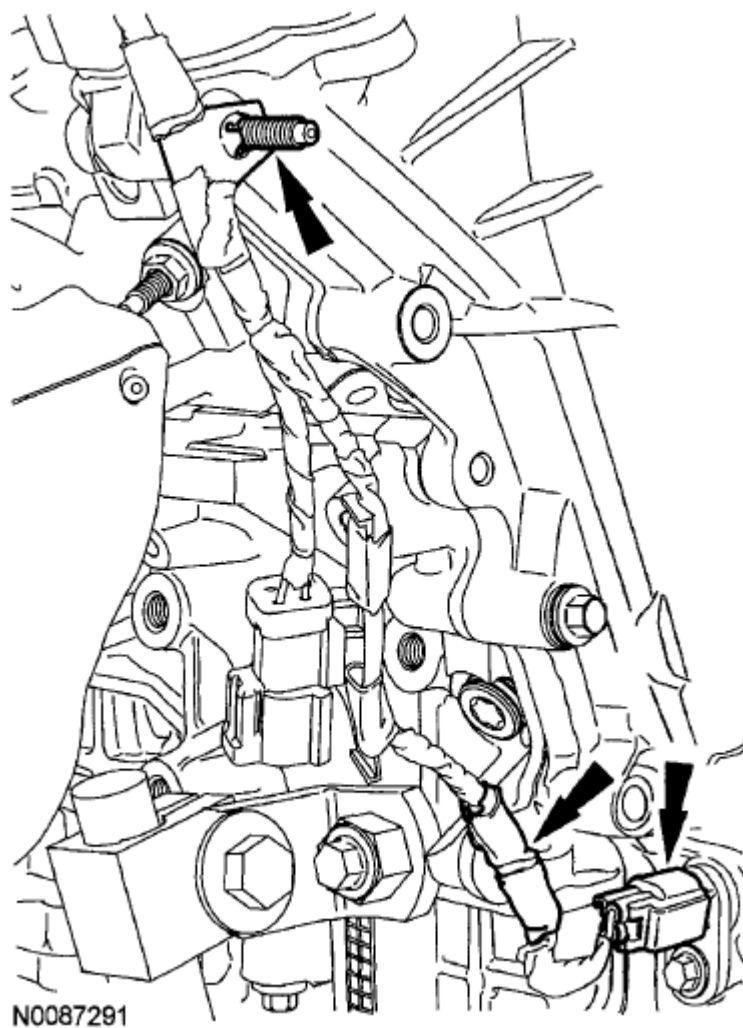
Locating Crankshaft Position (CKP) Sensor Electrical Connector And Wiring Harness Retainers
